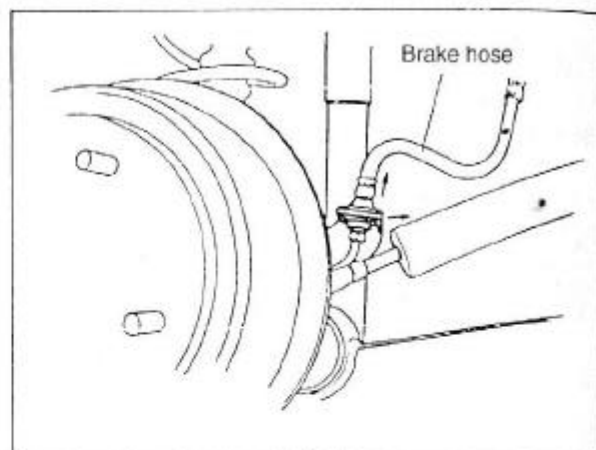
E — 5 REMOVAL OF BRAKE HOSE
